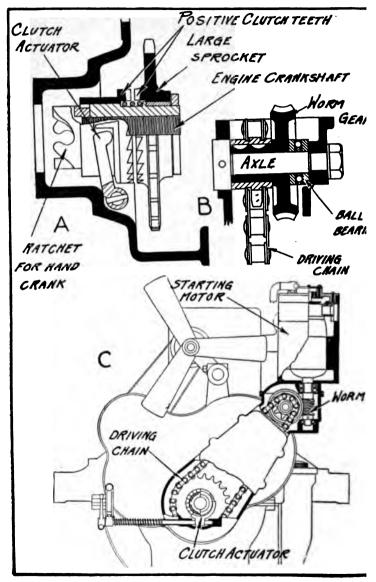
Method of Mounting Starting Motor Having Speed Redu Through Worm Gears and Roller Chains.
